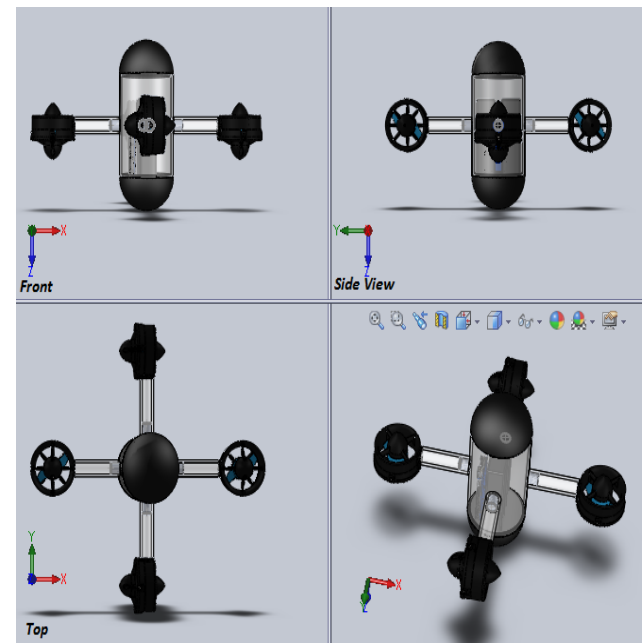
SolidWorks model representing front, top, side and isometric view of the robot
